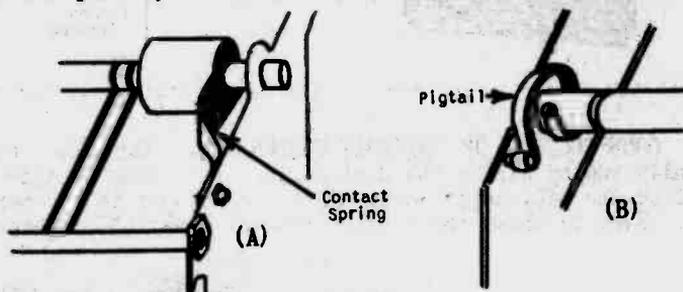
(A) Using a Contact Spring to Make Connection to the Rotor of a Variable Condenser.
